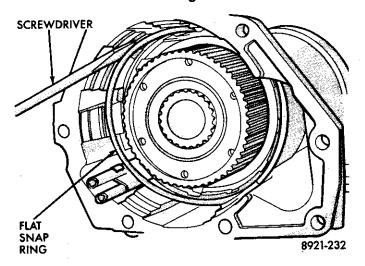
Removing/Installing Overdrive Clutch Flat Snap Ring
